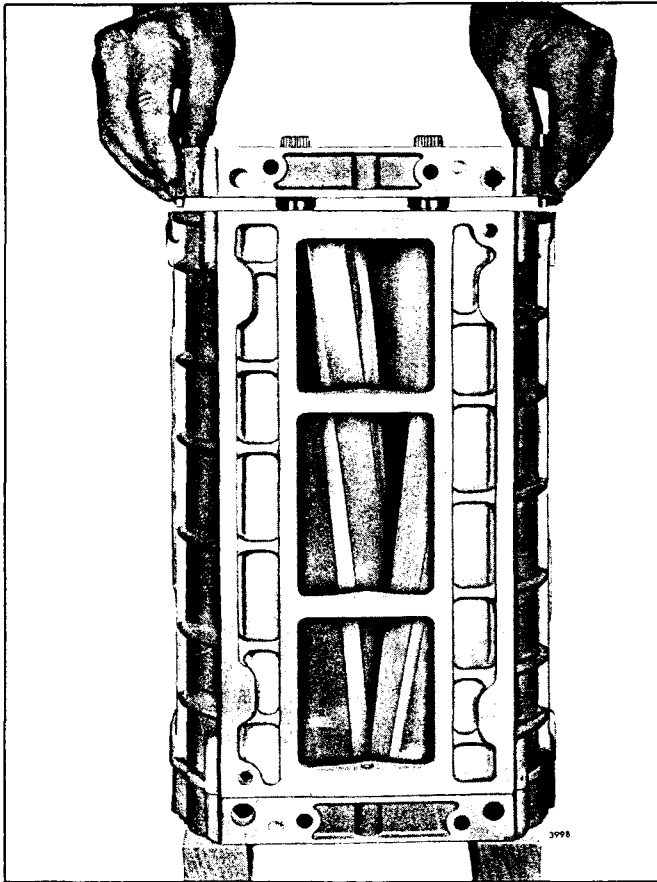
· Installing Rear End Plate on Blower Rotors and Mounting
